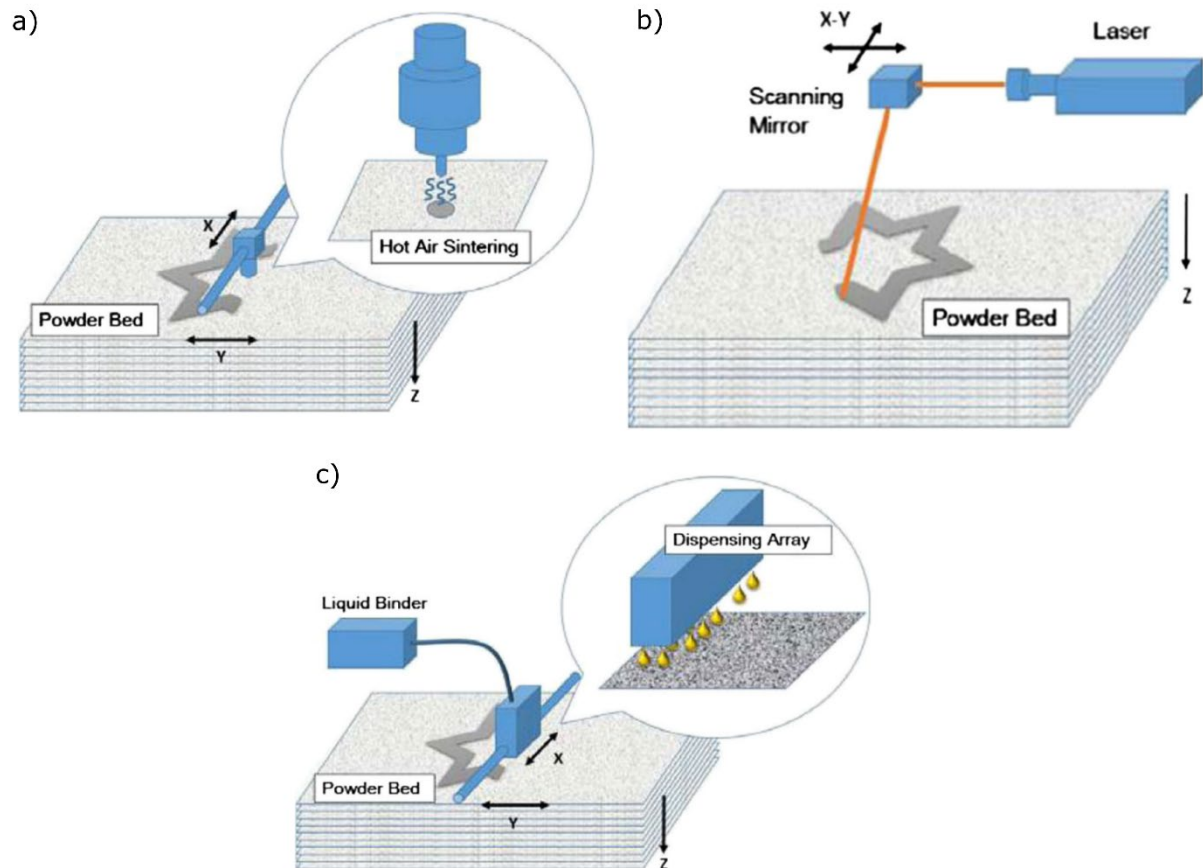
Powder-based 3D printing technologies (J. Sun, Zhou, et al., 2015): a) Hot air sintering; b) Selective laser sintering SLS; c) Binder jetting BJ.
